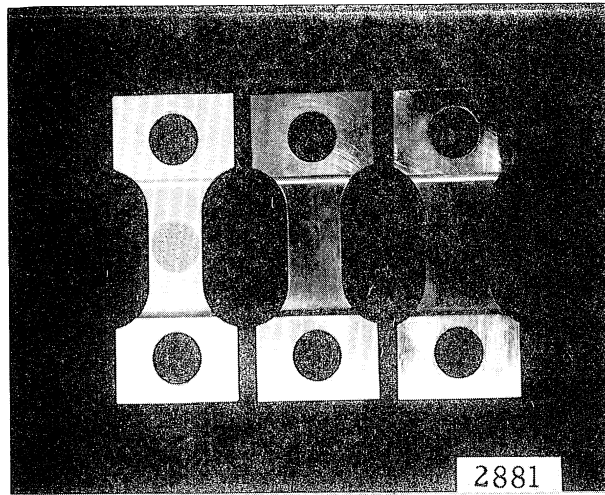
Photograph of Tension-Compression Specimens Before and After Cutting for Reduced Cross Section Tensile Test
